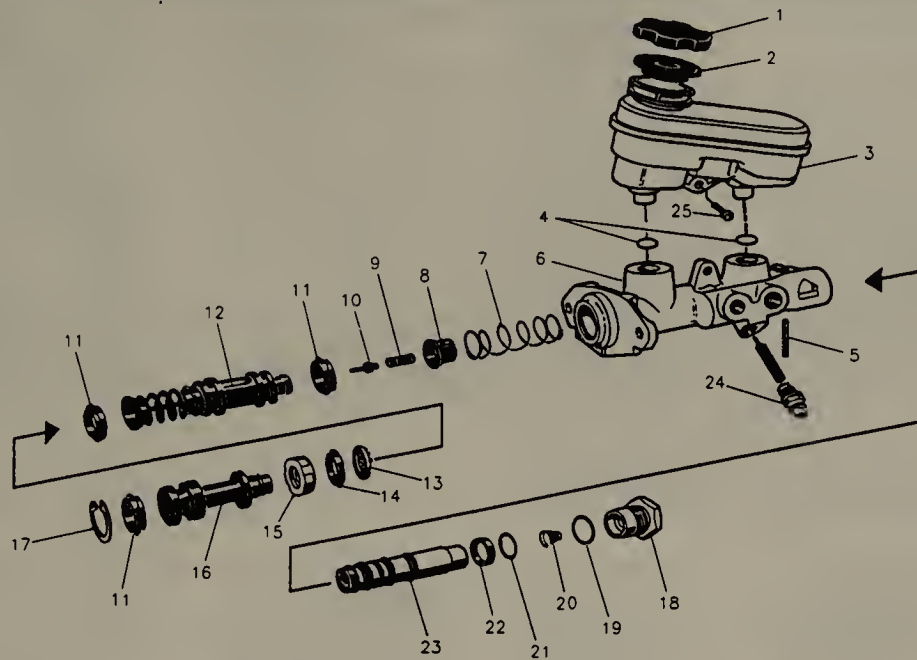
Exploded view of the master cylinder components, including the proportioning valve—1984–91 vehicles
